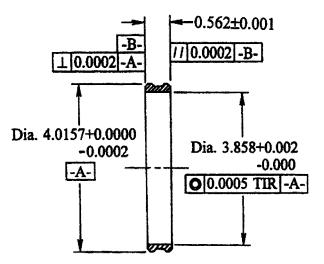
A typical lens spacer. Dimensions are in inches. (From Westort.³)
